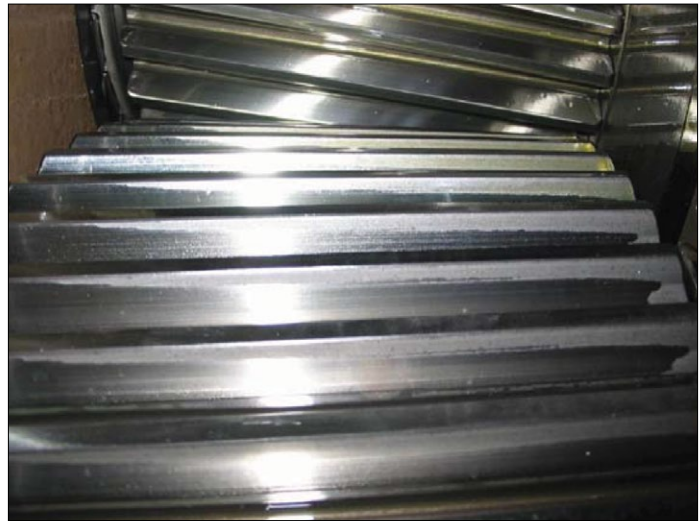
Micropitting gear failure of an industrial gearbox. (Source: Hochmann and Siebert. Gear Solutions, June 2012.)
